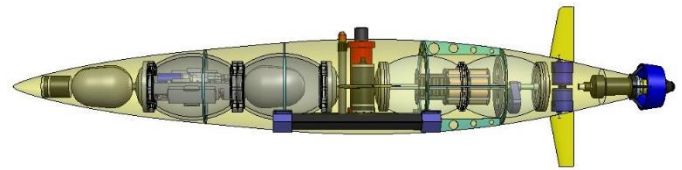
The Buoyancy Engine arrangement on fully Hybrid AUV Design
